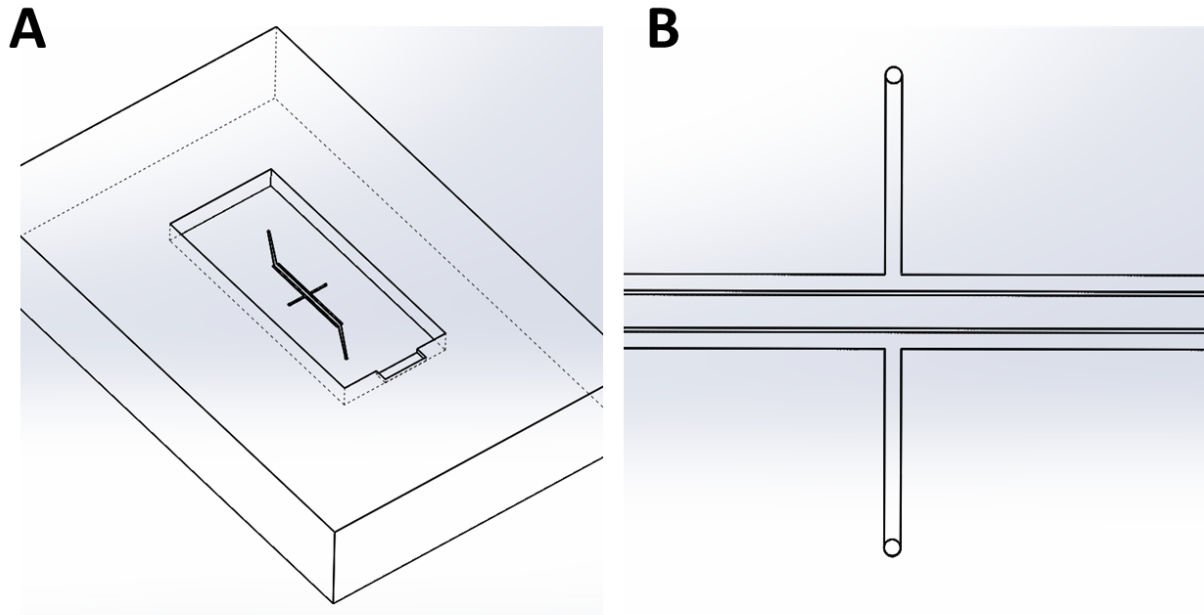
Lower half of open-top chip mold. A: lower half of chip mold. B: channels in chip.
